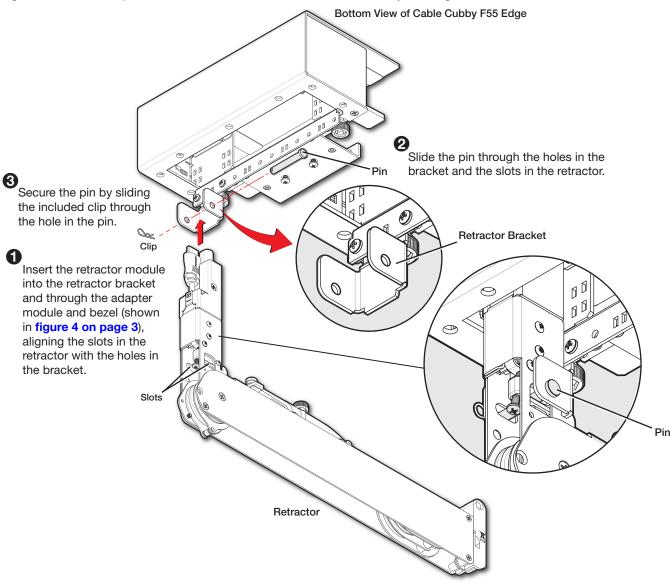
Mounting the Retractor to the Cable Cubby F55 Edge
